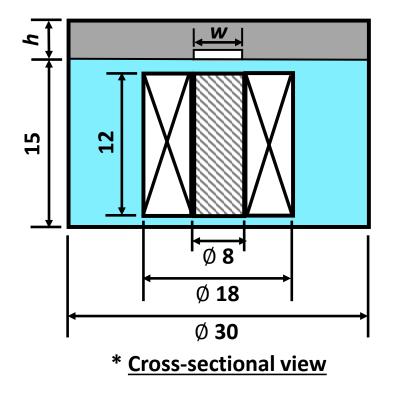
The detailed dimensions of the MRE valves presented, h and w are the adjustable parameters investigated in this work.
